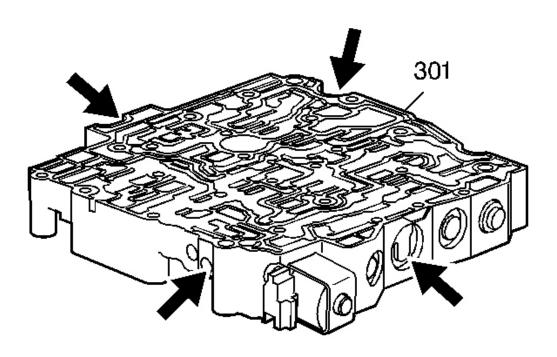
Inspection Areas Of Control Valve Body Courtesy of GENERAL MOTORS CORP.
